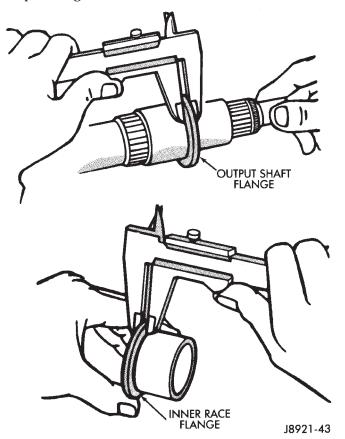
Check Shaft And Bearing Race Flange Thickness
